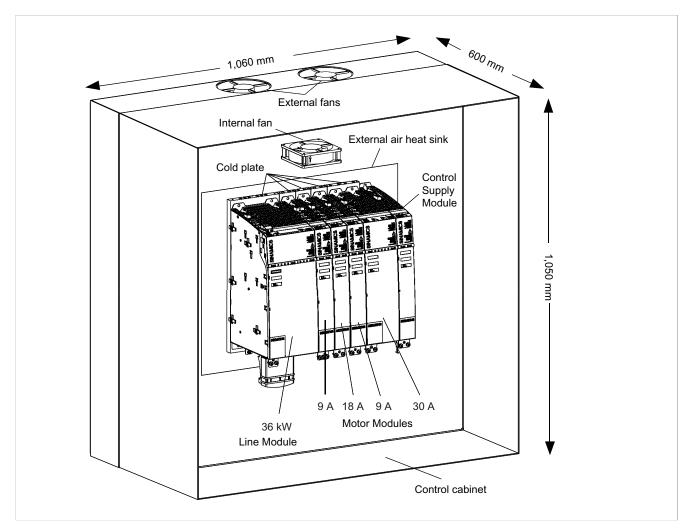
Example: cabinet setup with powers ections, cold plate, and external air heat sink
